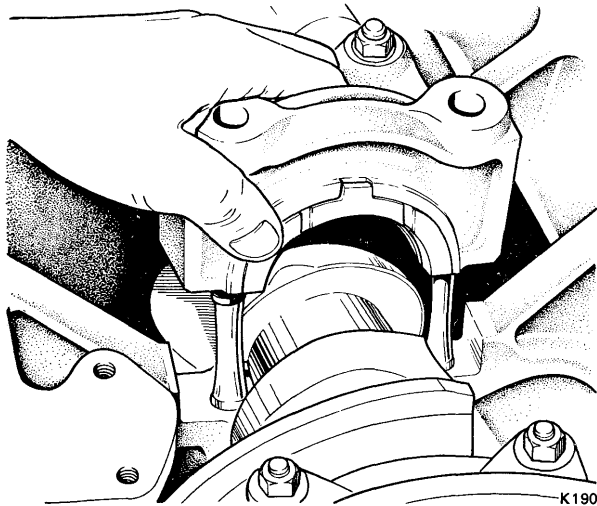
FITTING THE CENTRE MAIN BEARING CAP
